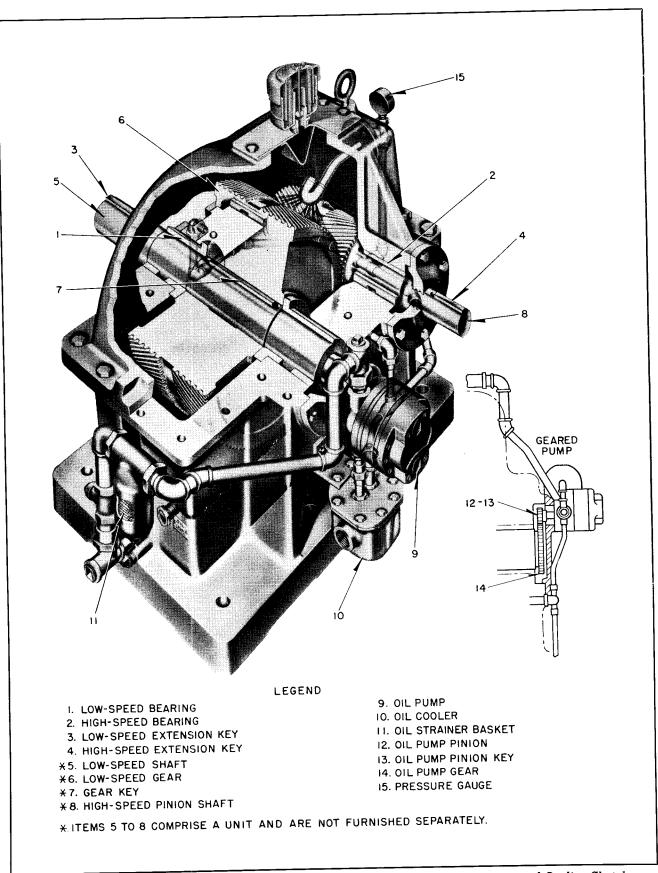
Cutaway View of Type SU High-Speed Gear Drive Showing Component Parts, and Outline Sketch of Geared Pump (Furnished Only as Required or Specified).
